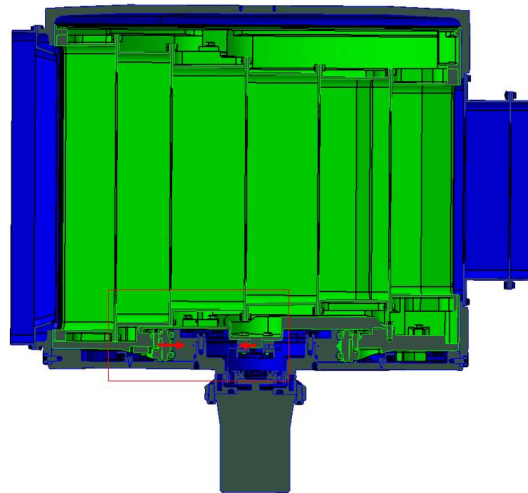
Grounding of Stator assembly (blue) and Rotor assembly (green)- cut view
